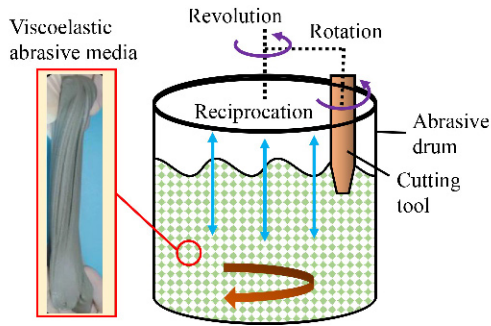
Schematic of the material removal mechanism in abrasive flow machining.
